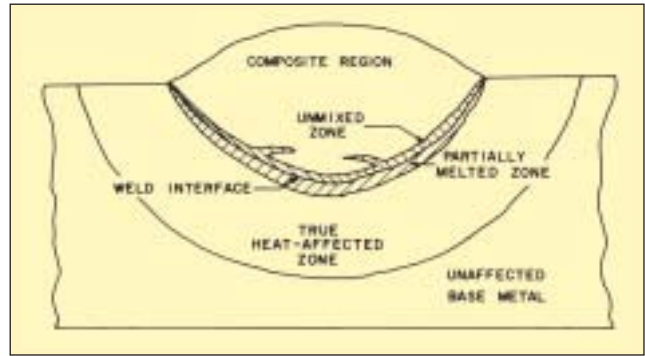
Schematic presentation of different weld zones [8].
